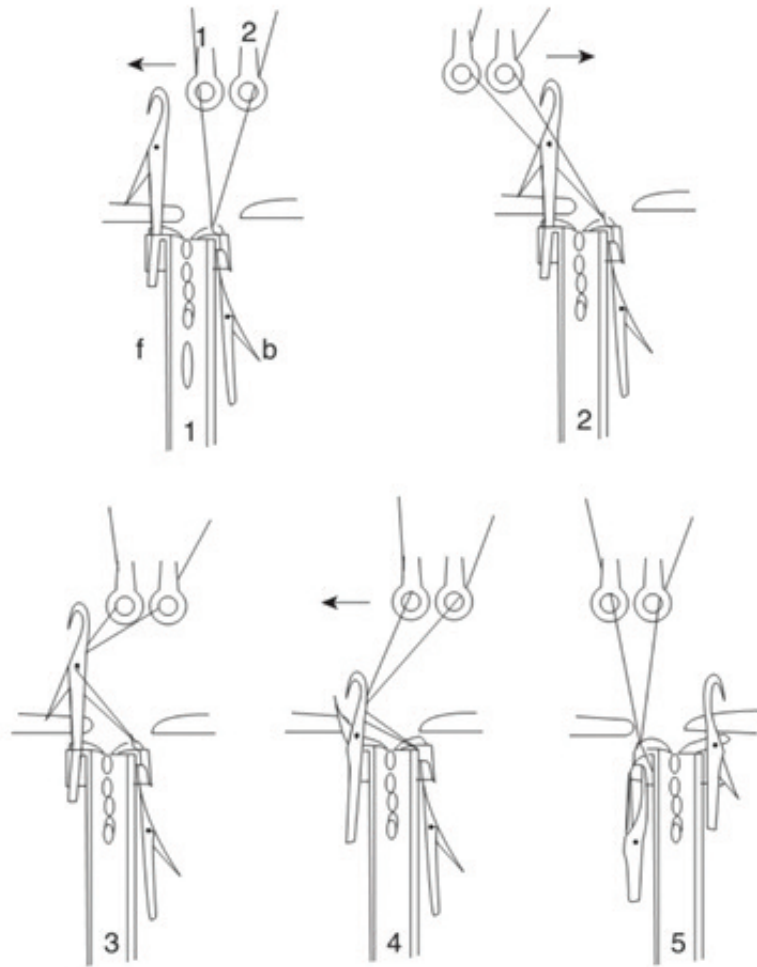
Knitting action of a double-needle-bar Raschel machine¹⁷⁾.
